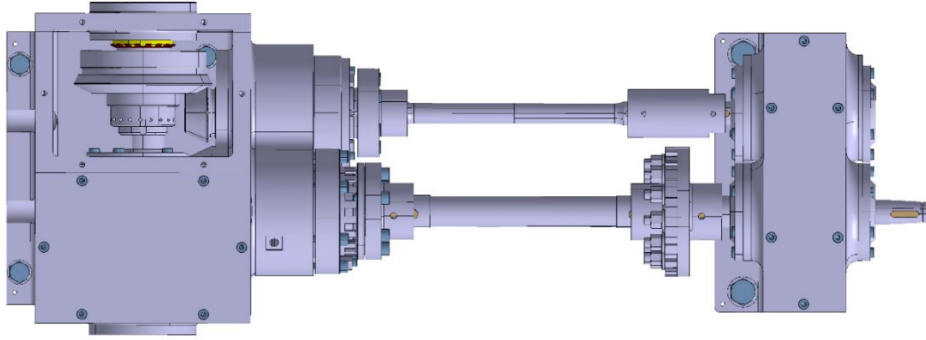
3D CAD Drawing of the Test Rig G31.75
